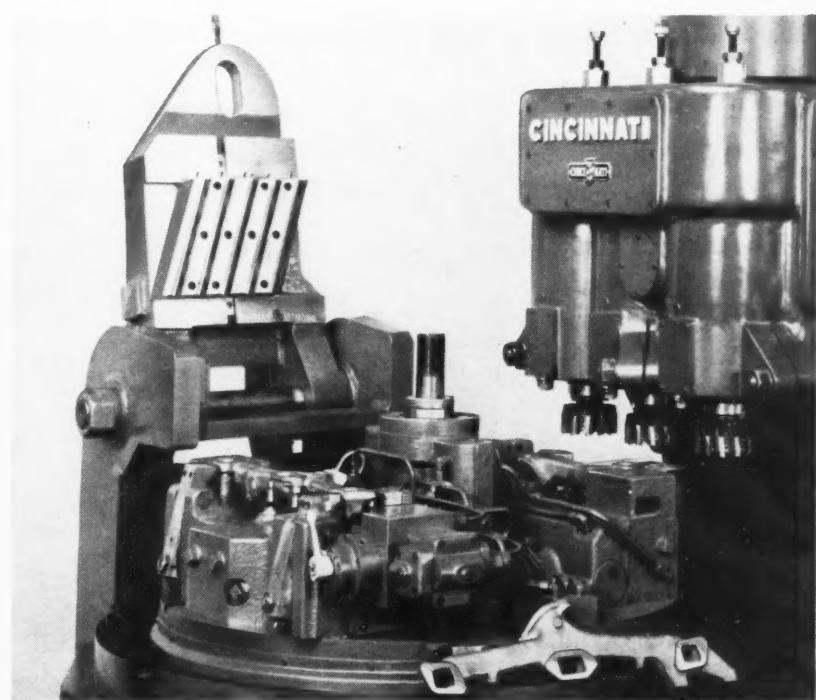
Broach-holder on machine illustrated in Fig. 1, shown in raised position to permit inspection and replacement of broach inserts
